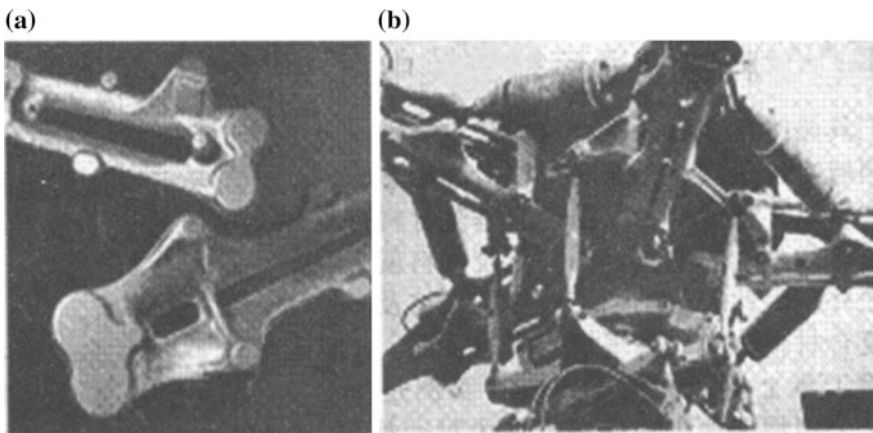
a Helicopter rotor system and b its connecting pieces
